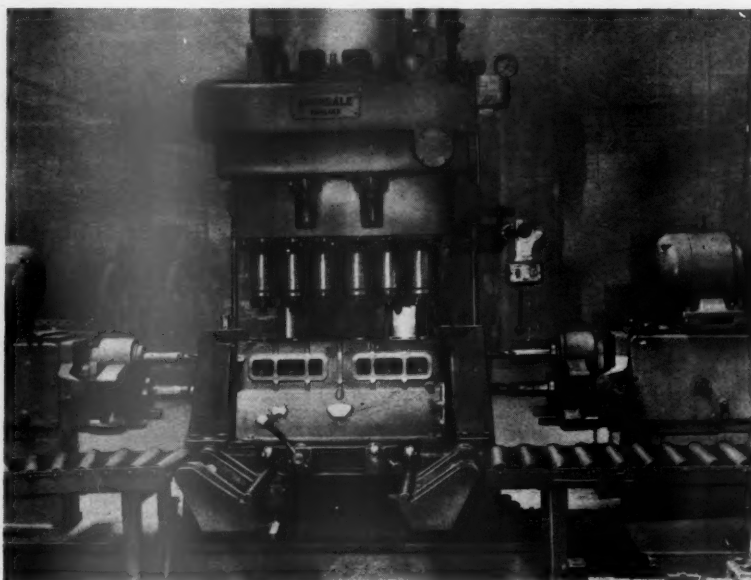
The traversing undercarriage and the block in position for rough boring the cylinder bores on an Archdale six-spindle vertical borer with two independent two-spindle horizontal heads.
